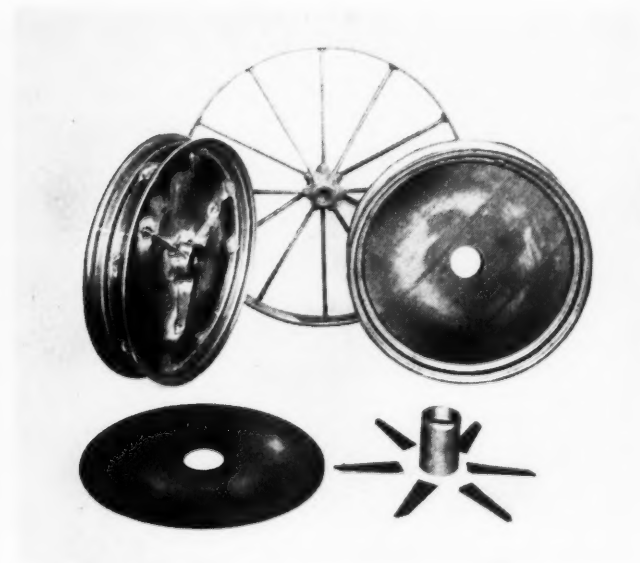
Old Wheel of Cast Construction and New Welded Wheel Employed for the Trucks
